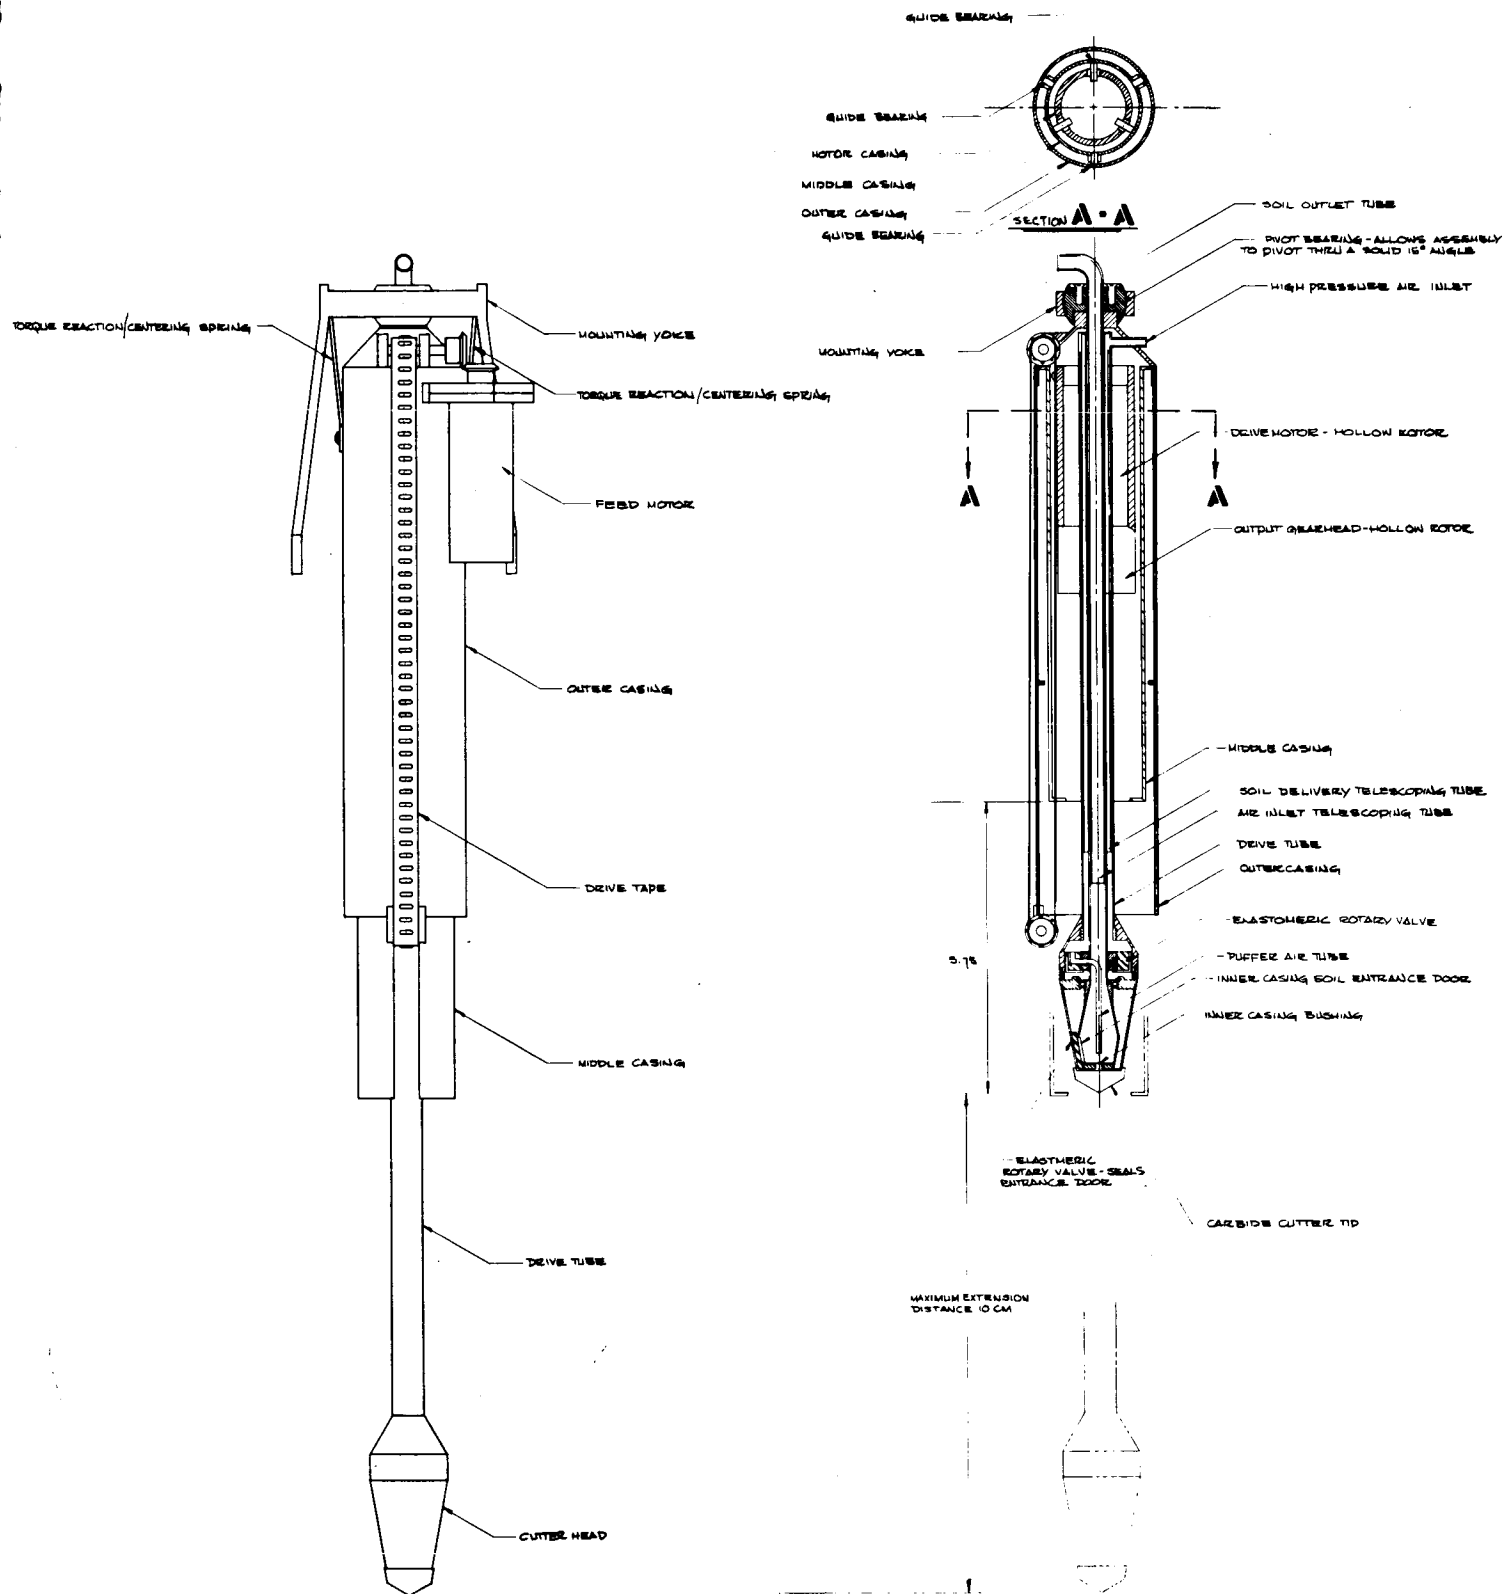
CONICAL ABRADING SIEVE CONE SAMPLER, E-3
